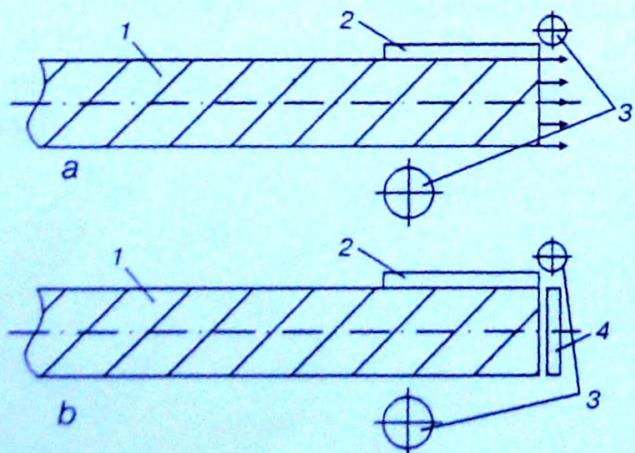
Disc with inductor without a shield (a) and with a shield (b): 1 - part; 2 - charge; 3 - ring-type inductor with two turns; 4 - shield
